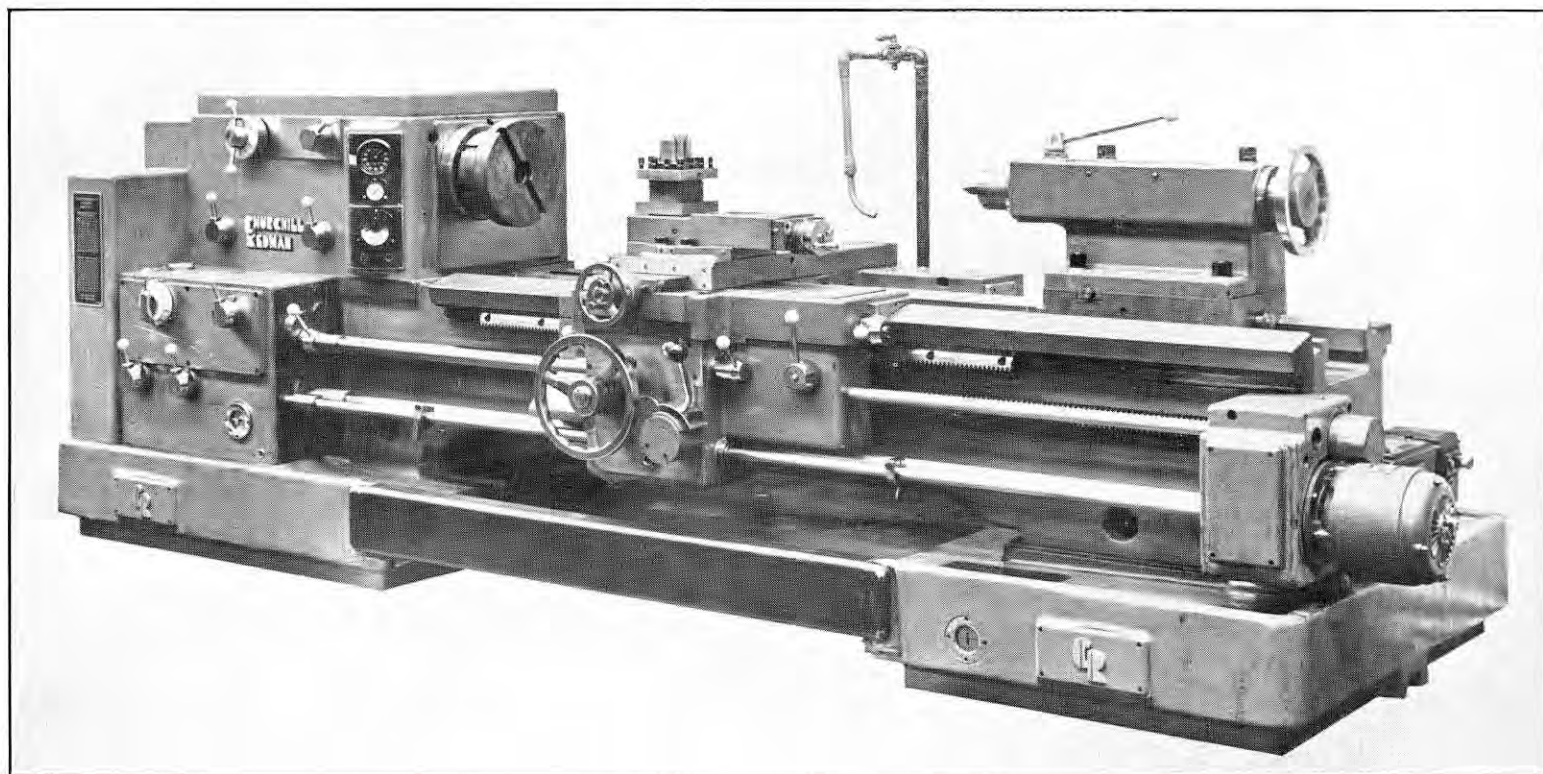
23-IN. SWING CENTRE LATHE; CHARLES CHURCHILL & CO., LTD.
